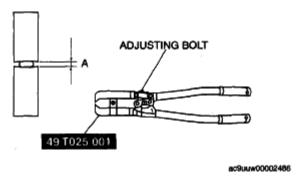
Adjusting Clearance Courtesy of MAZDA MOTORS CORP.
